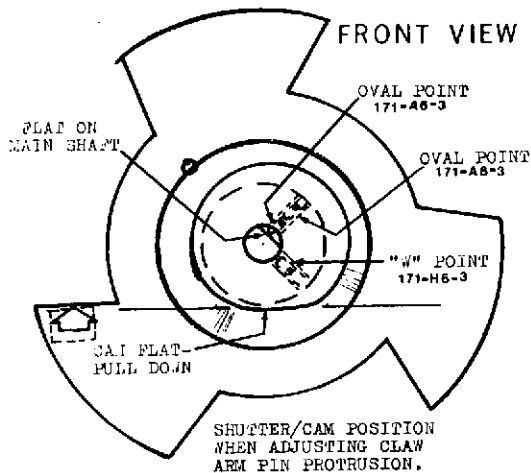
SHUTTER & SHAFT ALIGNMENT
